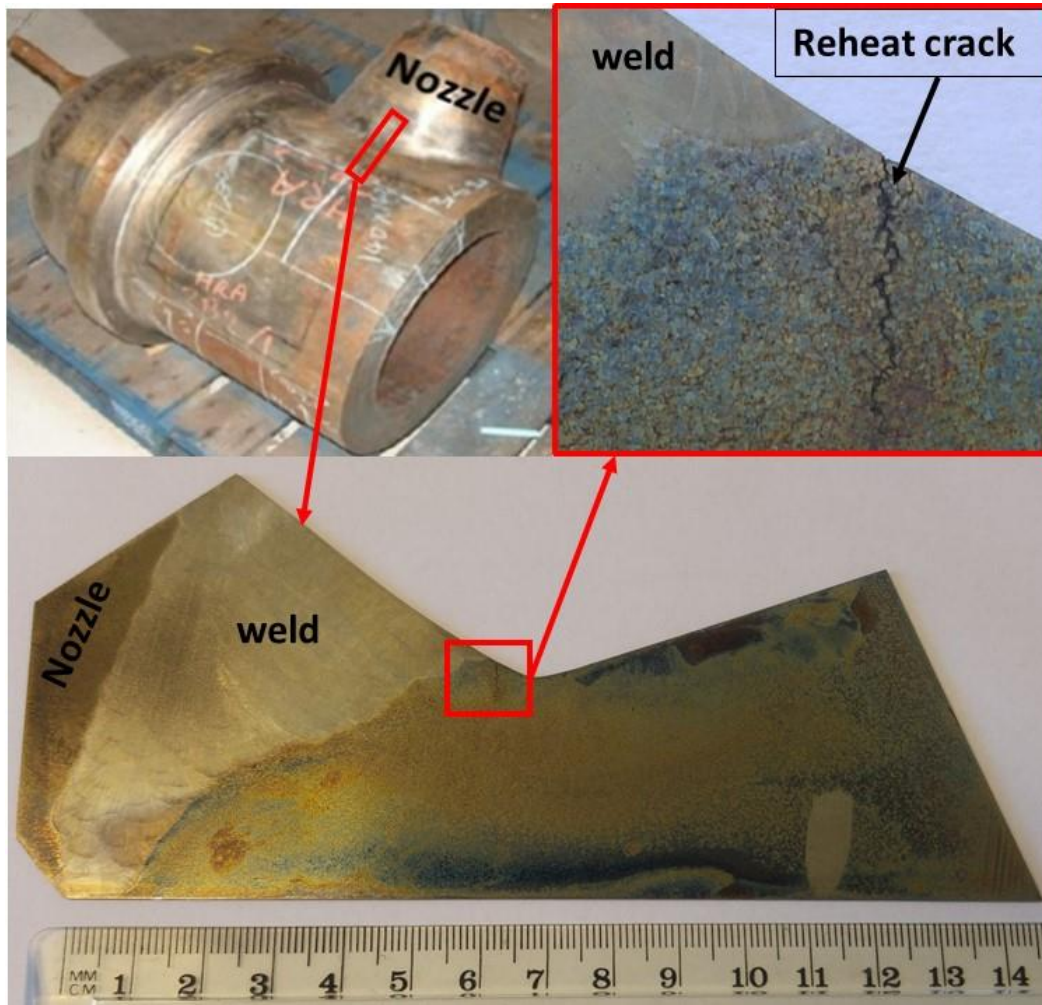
Photograph of a reheat crack near the weld in the ex-service 316H austenitic stainless steel steam header (HRA 2B2/1 cast 69431). The macrograph of weld was obtained by boiling the weldment in a solution of 50% HCl in water at 70°C [147].
